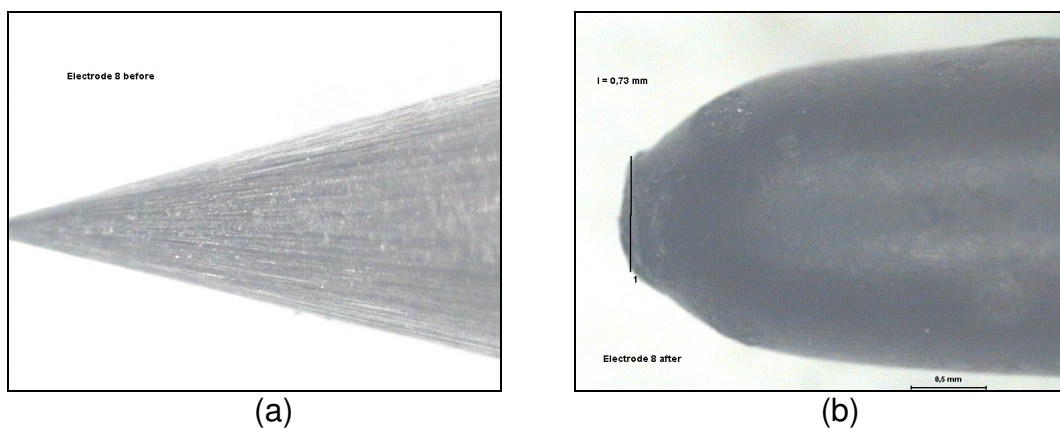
Angle of Electrode 8 used for experiment number 8: (a) before welding $\leq 28.83^\circ$; (b) after welding $\leq 96.10^\circ$.
